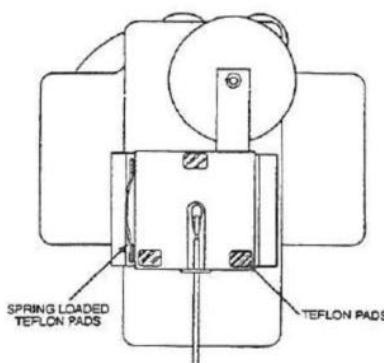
7 Bottom of Standard Dektak3ST Stage Assembly
